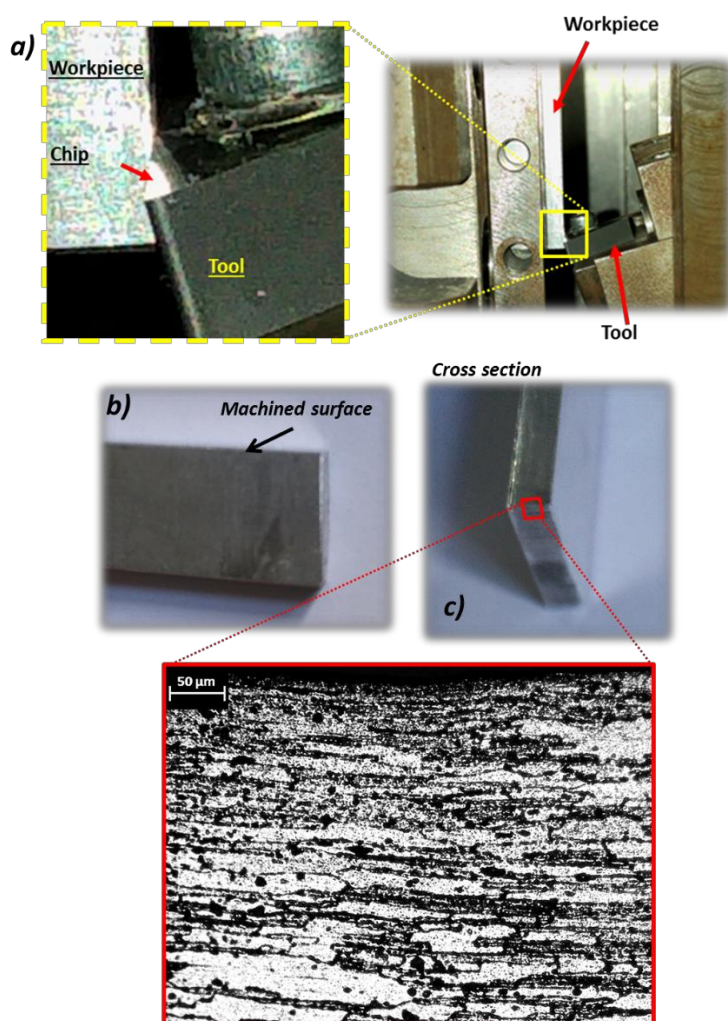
a) Frame of the machining test, b) longitudinal section of the machined sample; c) cross section of the machined sample and the related microstructure.
